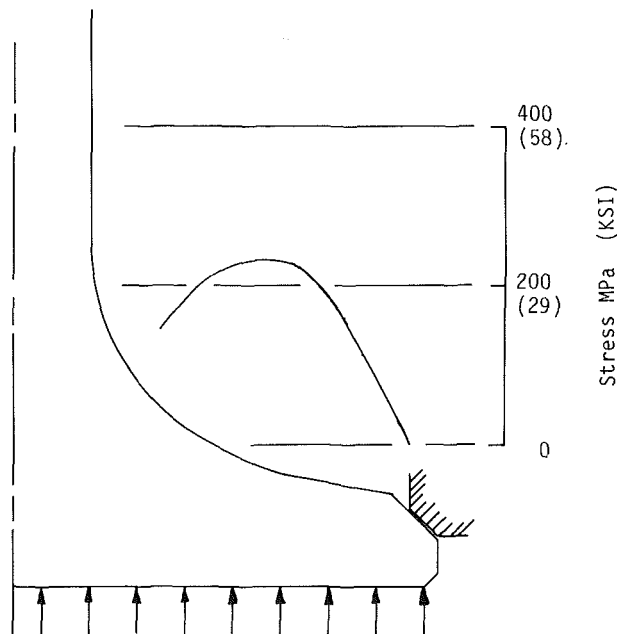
Tensile stresses on the surface of the port side of the valve head from combustion loading
